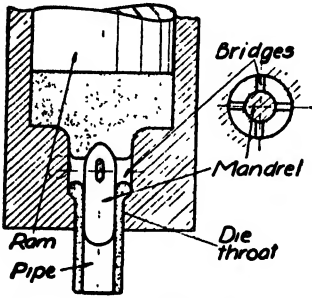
Manufacture of Extruded Lead Pipe.
